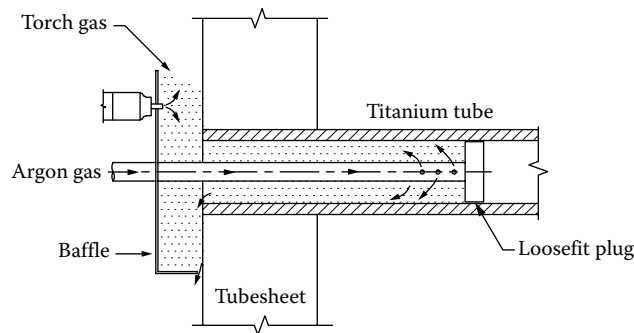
Gas shielding for titanium tube-to-tubesheet welding.
